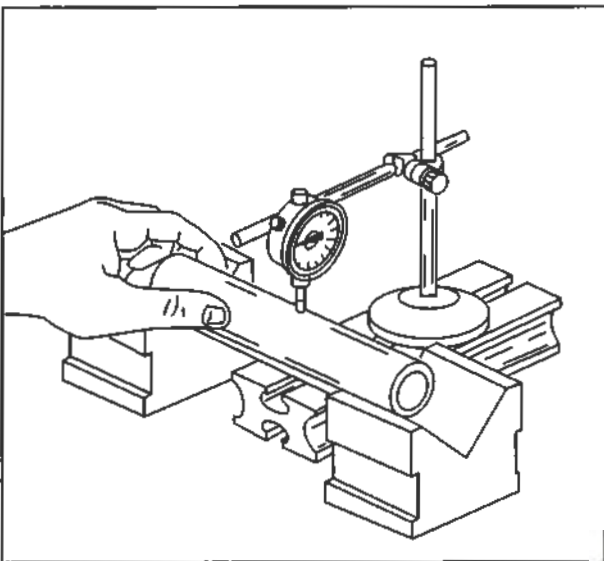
Piston pins are dimensionally inspected for straightness with vee-blocks and a dial indicator. As a pin rotates on the vee-blocks, the dial indicator records runout.
